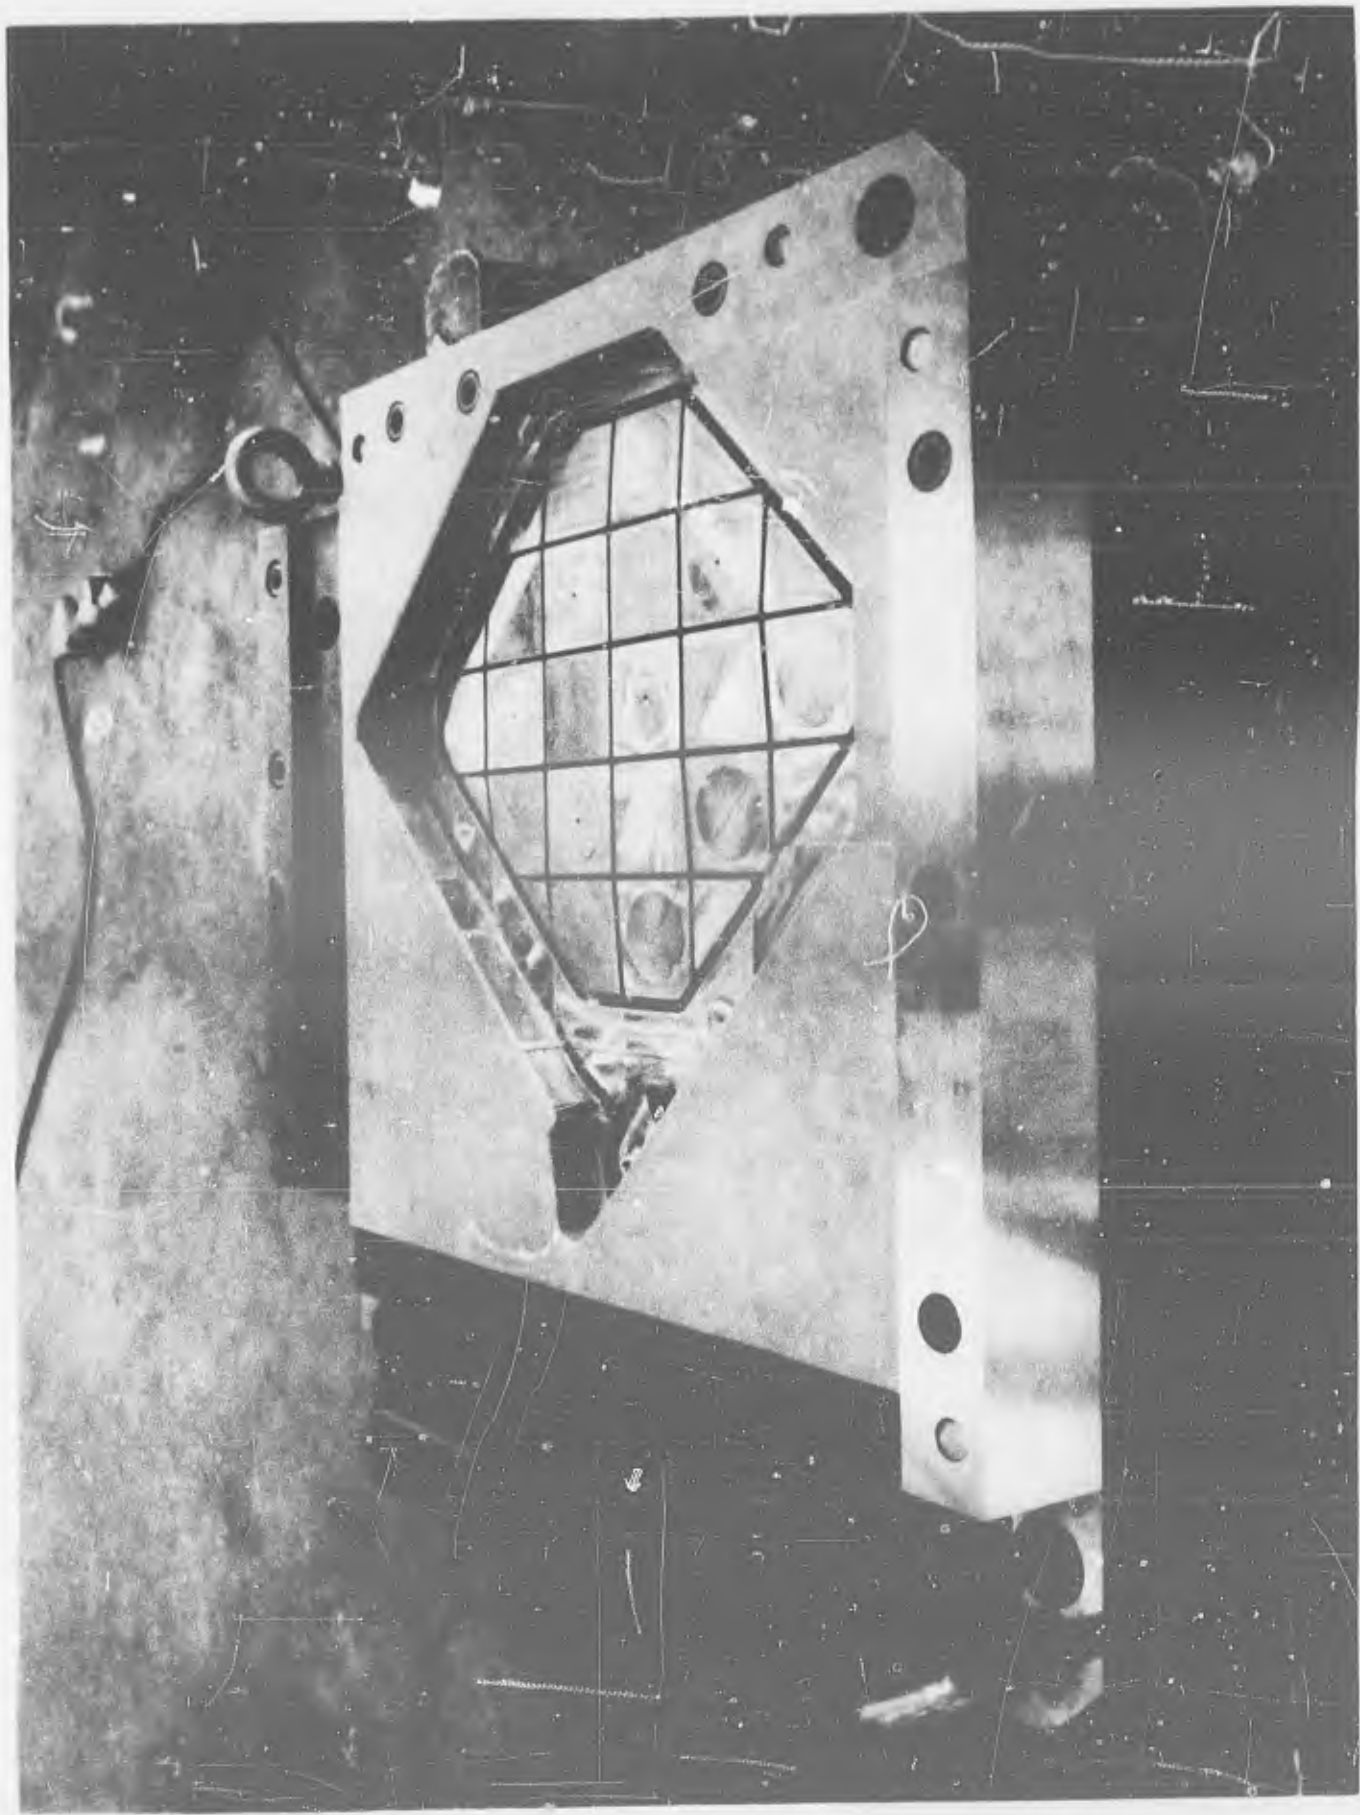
Die Insert Assembly Showing the Two Wedges Which Hold Inserts in Position Preventing Lateral Spread.
